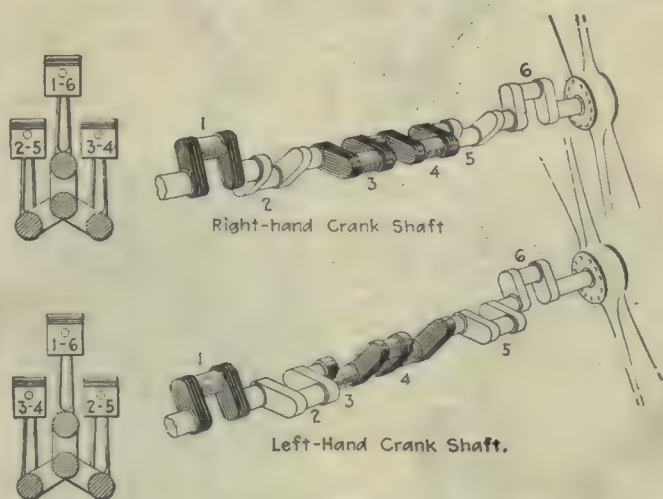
RIGHT- AND LEFT-HAND SIX-CYLINDER CRANKSHAFTS
